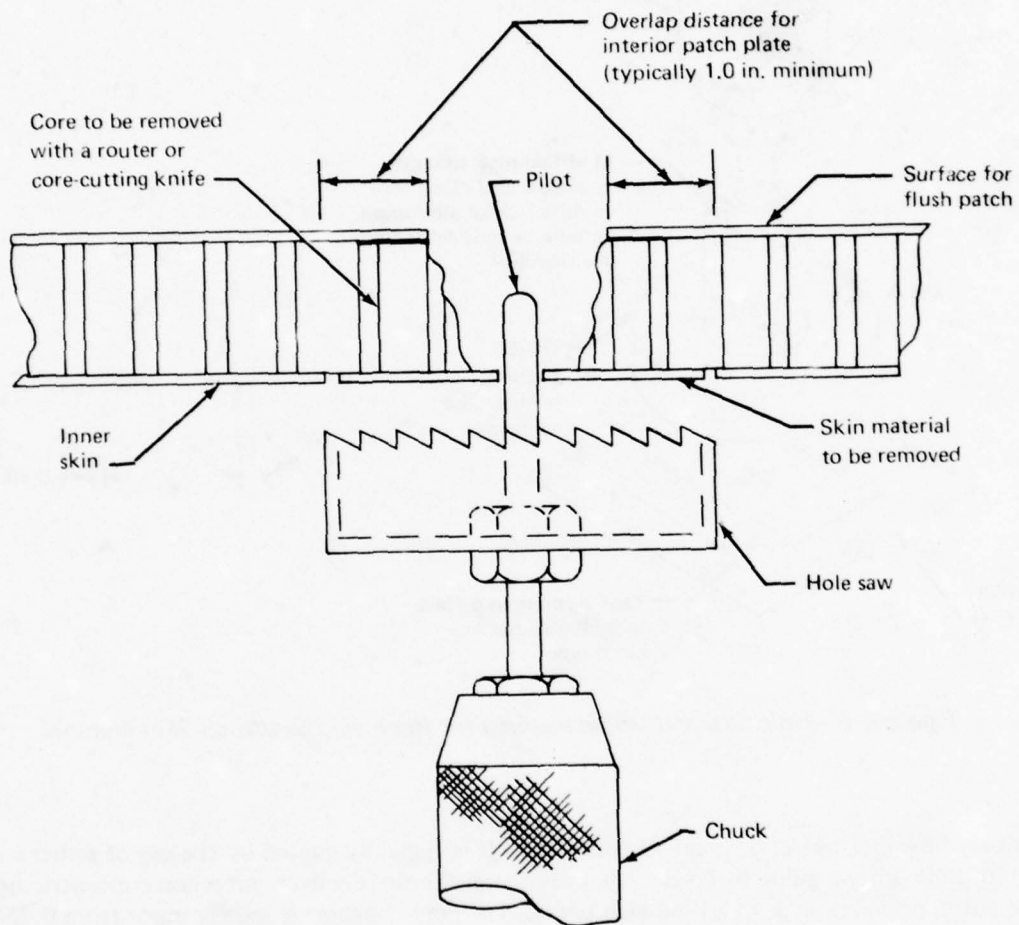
Removal of Skin Using a Pilot Hole as Hole Saw Guide
